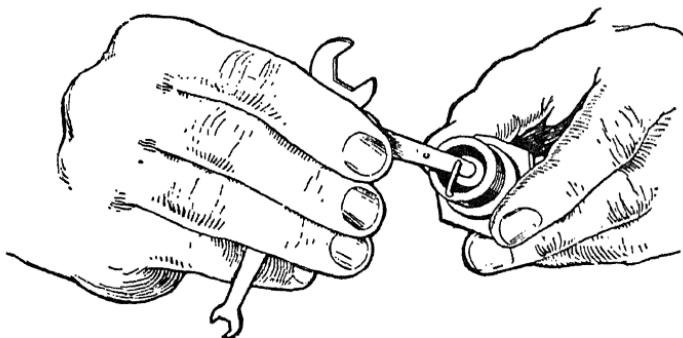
Setting and Gauging Spark-Plug Air Gap
